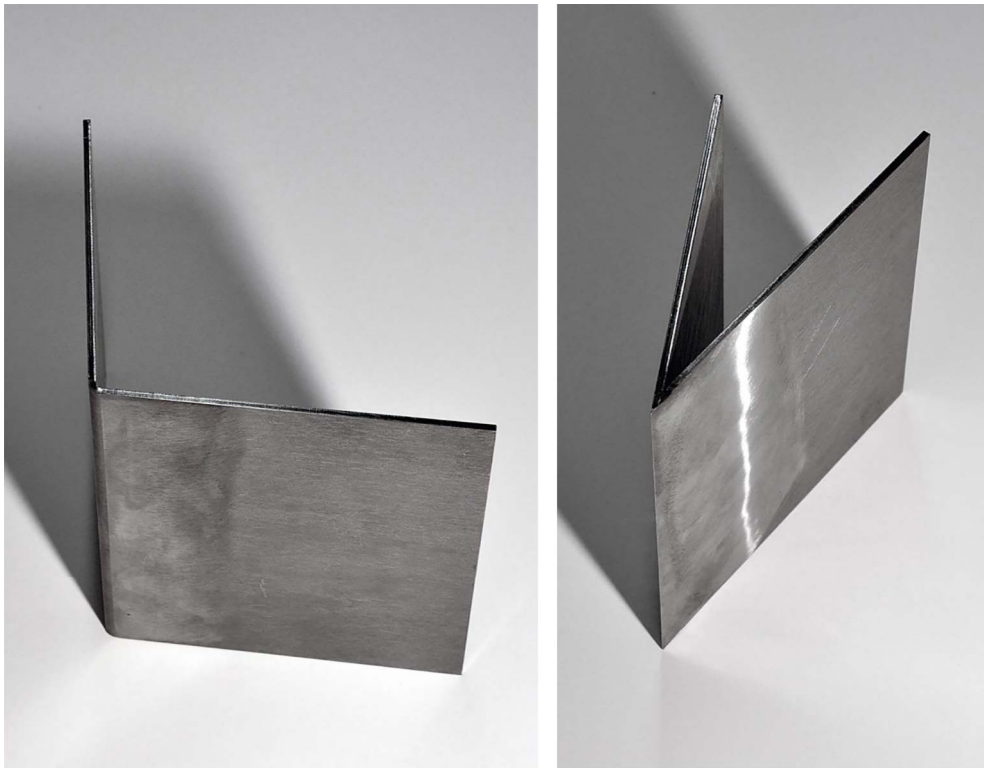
Detail samples showing the two types of edges in the foldDESK. (Left) Physically bent edge with a rounded profile. (Right) Welded edge with a sharp profile.
